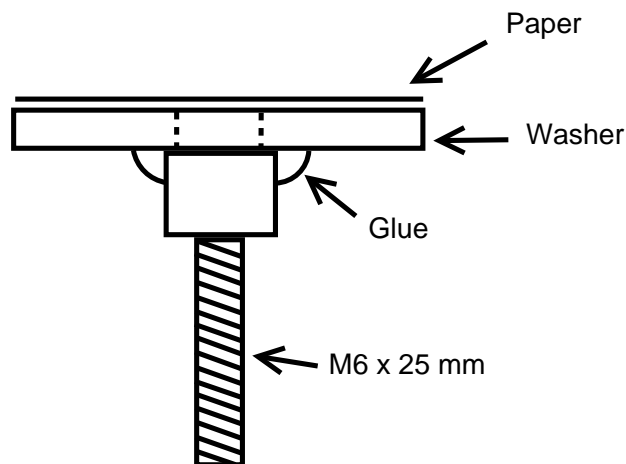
Bolt washer assembly used for KinectTM calibration.
